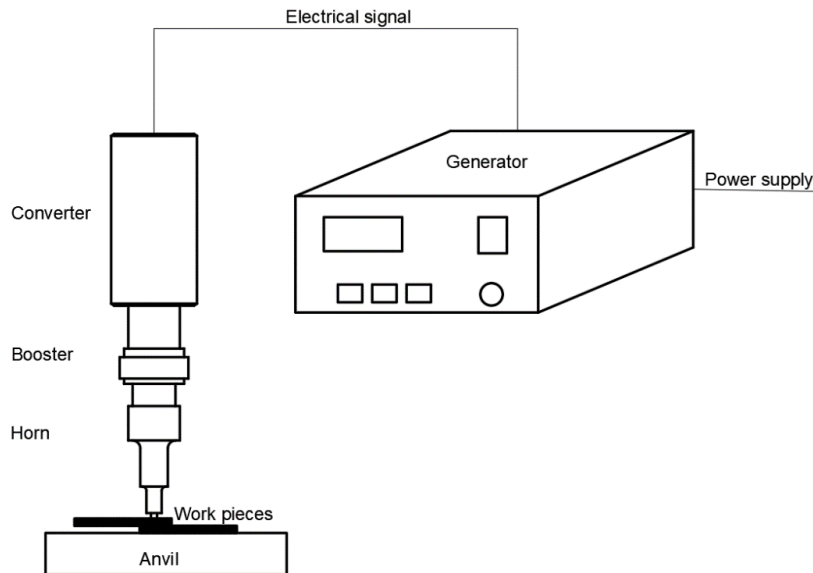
Schematic diagram for ultrasonic welding process device
